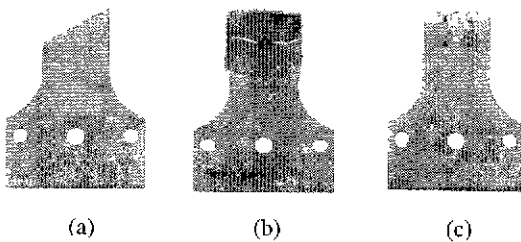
Fracture shape for tensile test of (a) no patch bonded specimen, (b) patch bonded specimen, (c) patch riveted specimen.
